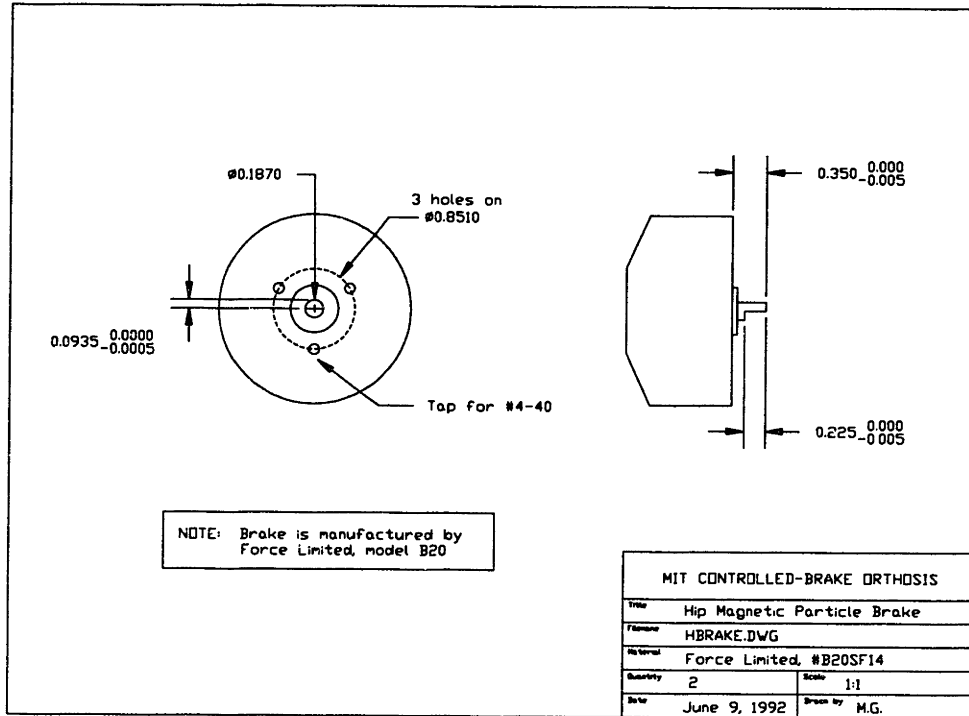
Mounting configuration of hip magnetic particle brakes.
